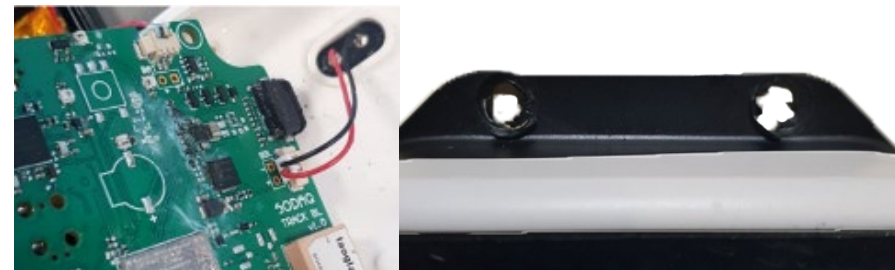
(a) PCB failure after a water ingress protection test (b) damaged mounting holes after dismounting from asset
